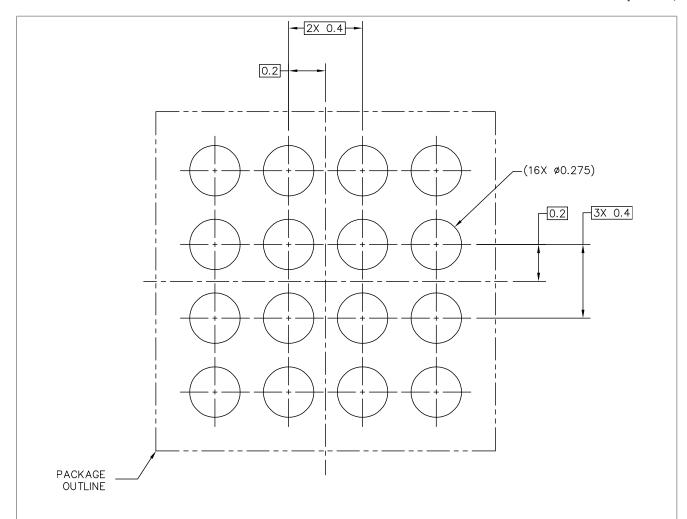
Reflow soldering for the WLCSP16 (4x4) package (2 of 3)
